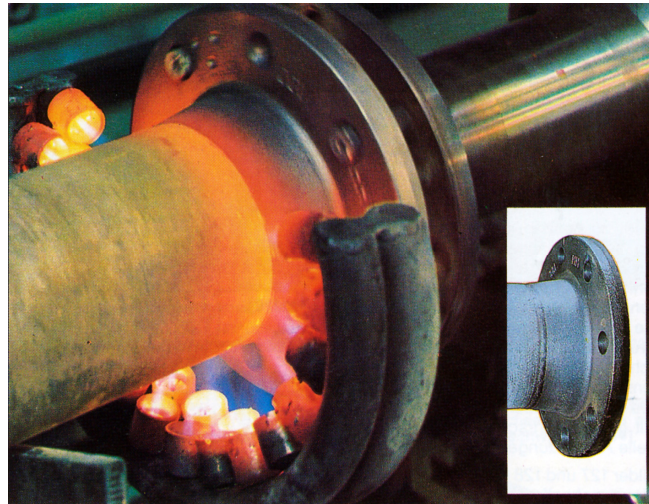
Plasma welded joint between a centrifugal casting tube and a spheroidal graphite cast iron (JS) flange
